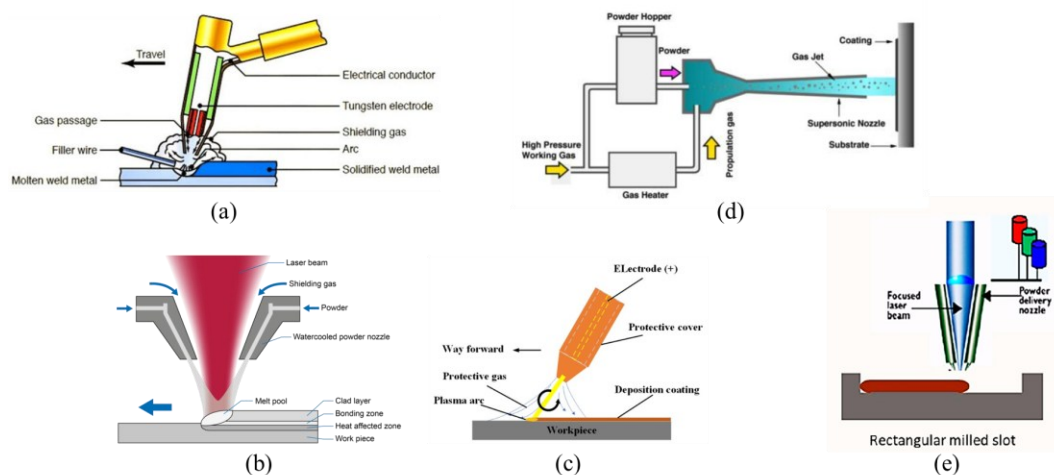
Examples of the techniques used in remanufacturing of dies/moulds: (a) GTAW; (b) laser welding; (c) electro spark; (d) cold spray; (e) DED²³.
